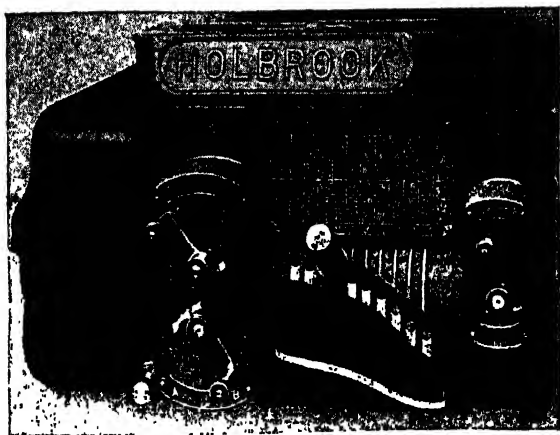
Holbrook Quick-Change Lathe Gear Box and Tumbler.
